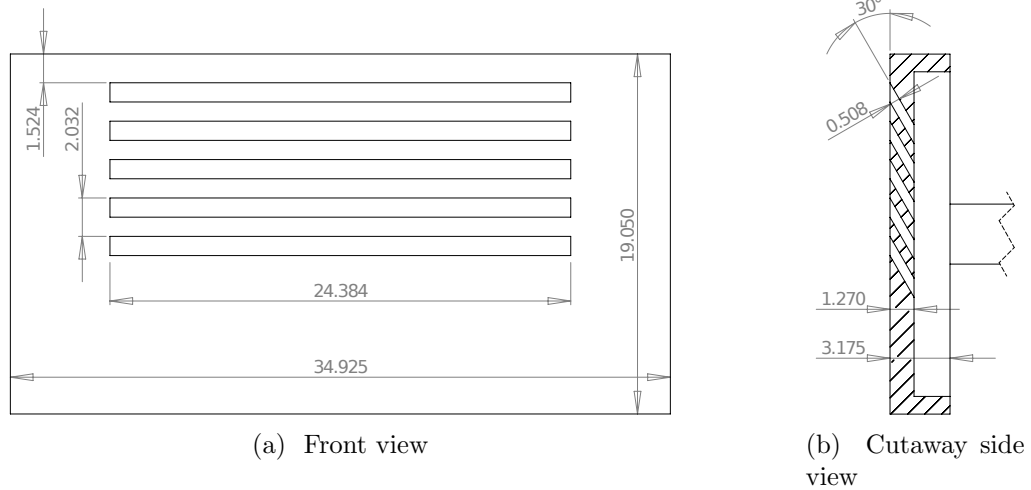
Drawing of five slot row test coupon; freestream flow from bottom to top; dimensions in mm
